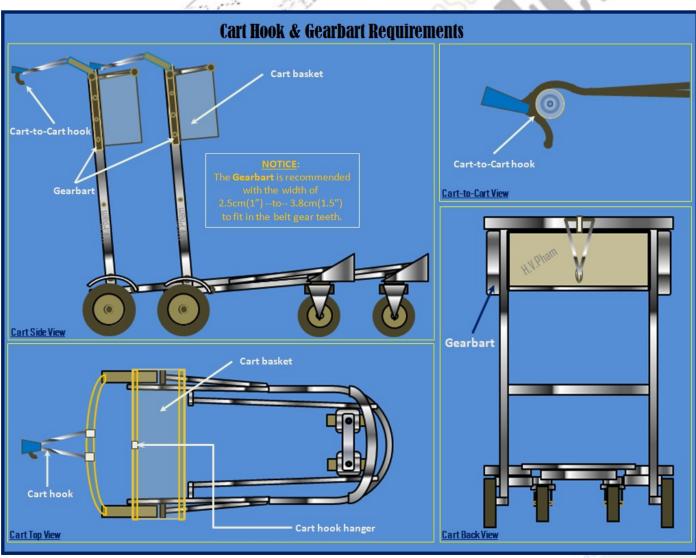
OH SMART AIRPORT -Smart Gear Belt Cart View
